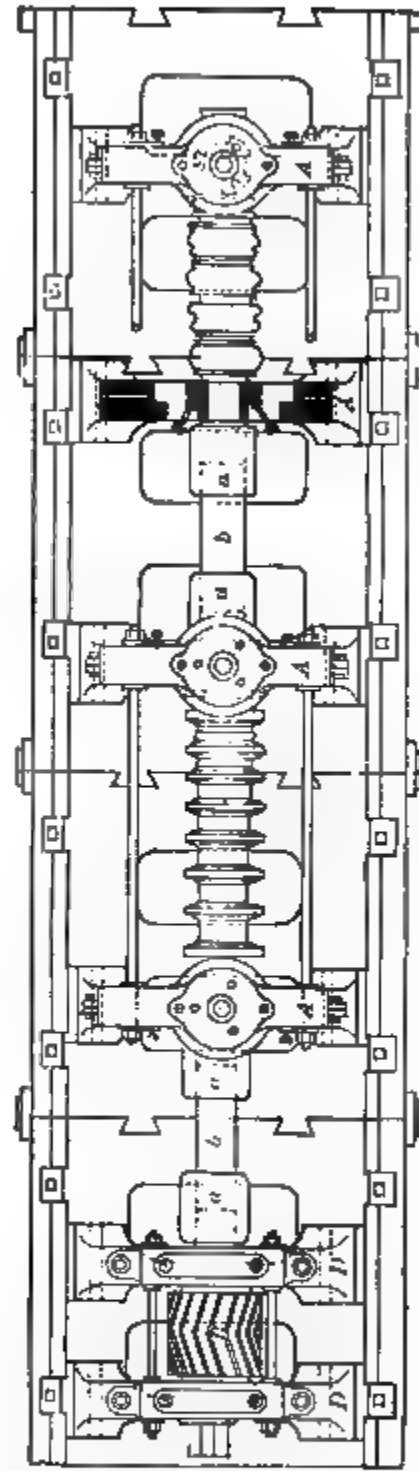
Mill Rolls with One Standard in Section, Plan.
